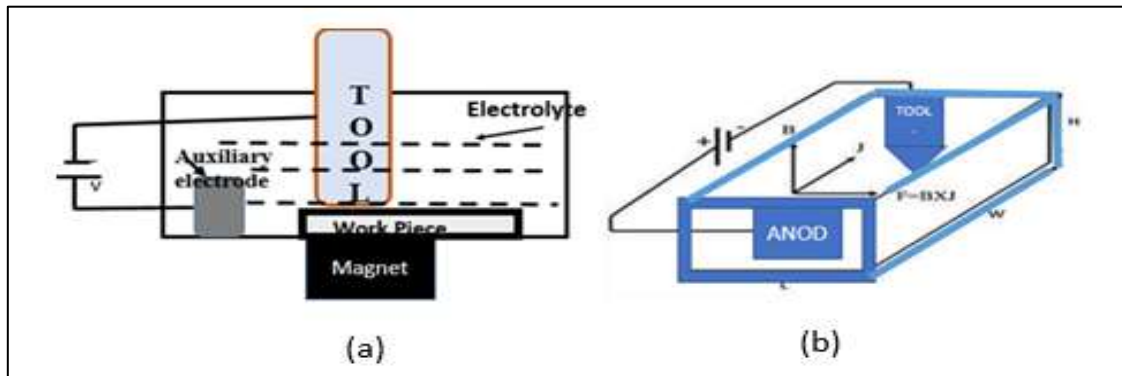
(a) MAECDM setup schematic; (b) Direction of Lorentz force components due to magnets installed below the workpiece.
